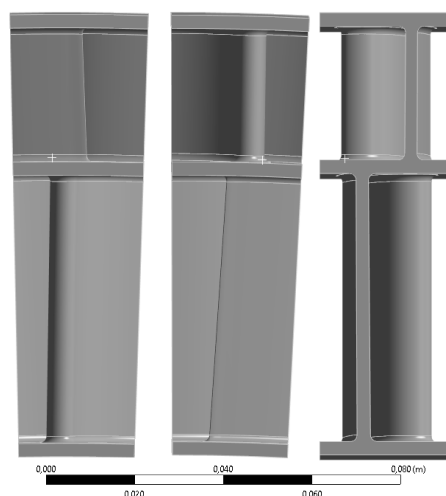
Three-dimensional geometric model of the rotor blade of the first and last stage
